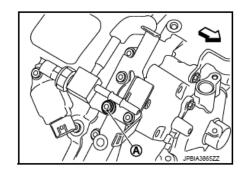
Identifying Fuel Feed Hose Mounting Bolt Courtesy of NISSAN NORTH AMERICA, INC.
